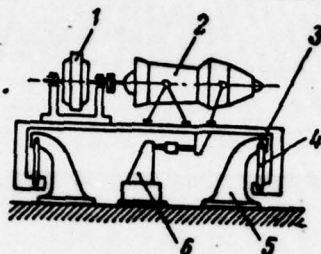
Machine tool for determining equivalent horsepower. 1 - hydraulic brake, 2 - engine, 3 - transfer table, 4 - elastic tapes, 5 - mounting, 6 - dynamometer.
